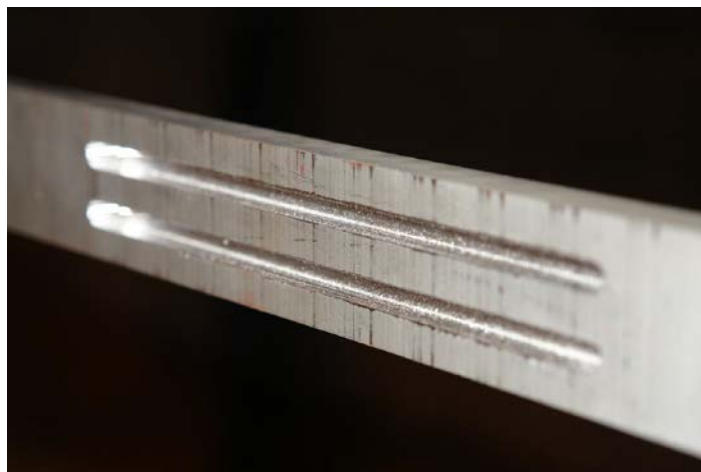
Close-Up of Test Sample Bar With a Milled Cross Section
